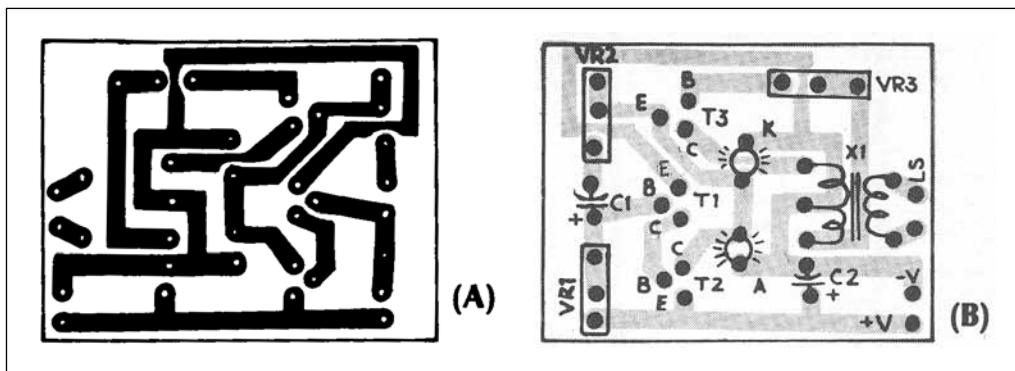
Actual-size PCB (above), and components layout for the flasher.
